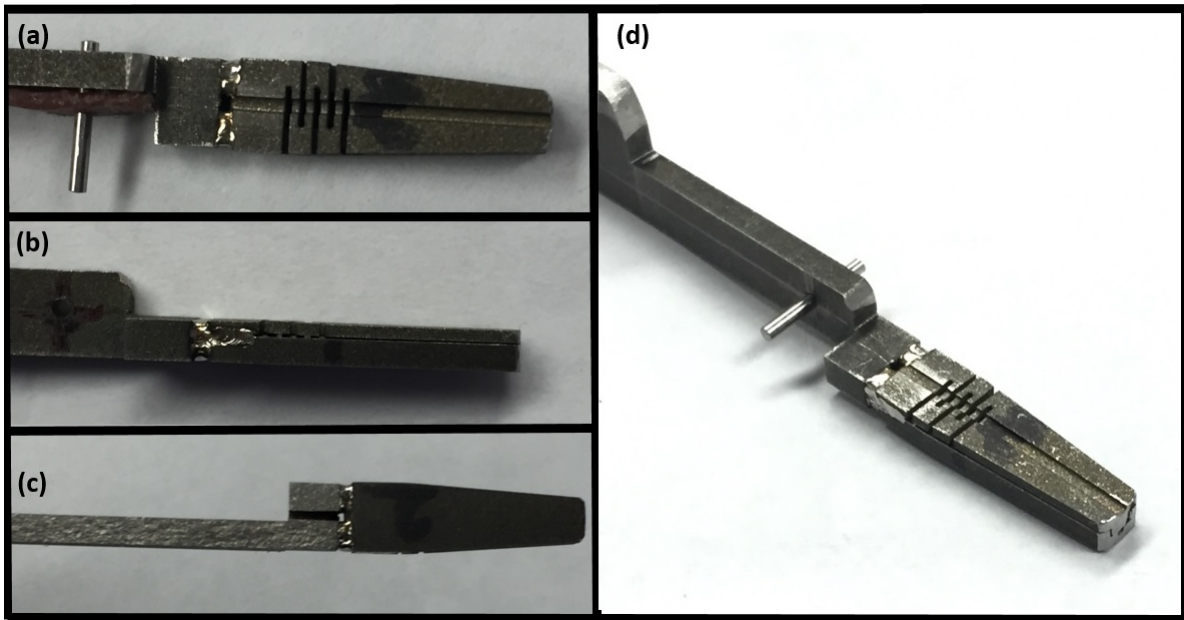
a) Top view of the welded grasper; b) Side view of the welded grasper; c) Bottom view of the welded grasper; d) Lower jaw of the needle-driver grasper after welding several pieces of the jaw.
